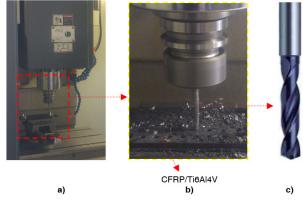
Drilling experiments: a) CNC vertical machining center, b) Workpiece, c) Cutting tool
